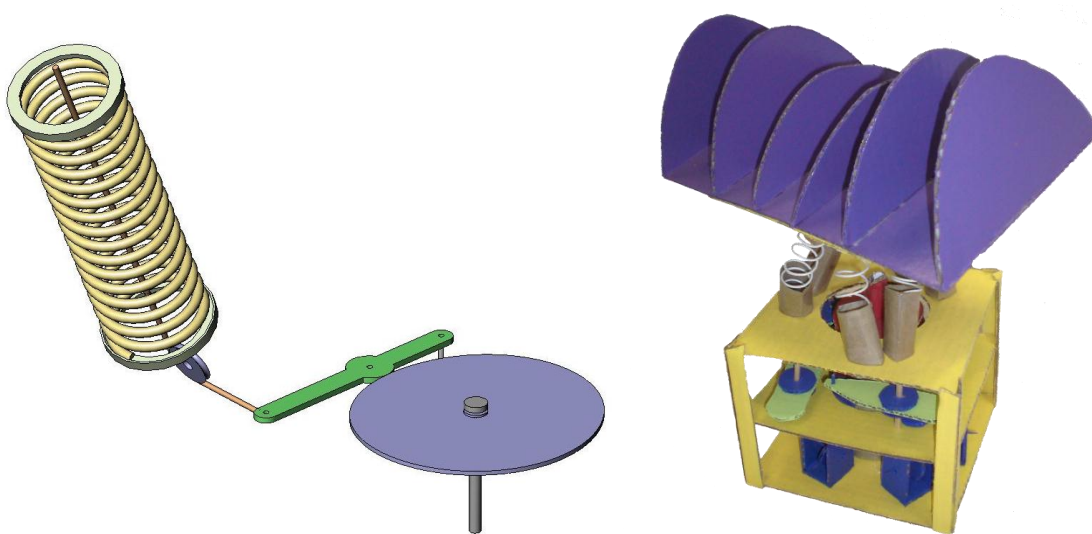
Spring, Cable, and Cam Design Concept (Left), 1/5 Scale Cardboard Model (Right)
